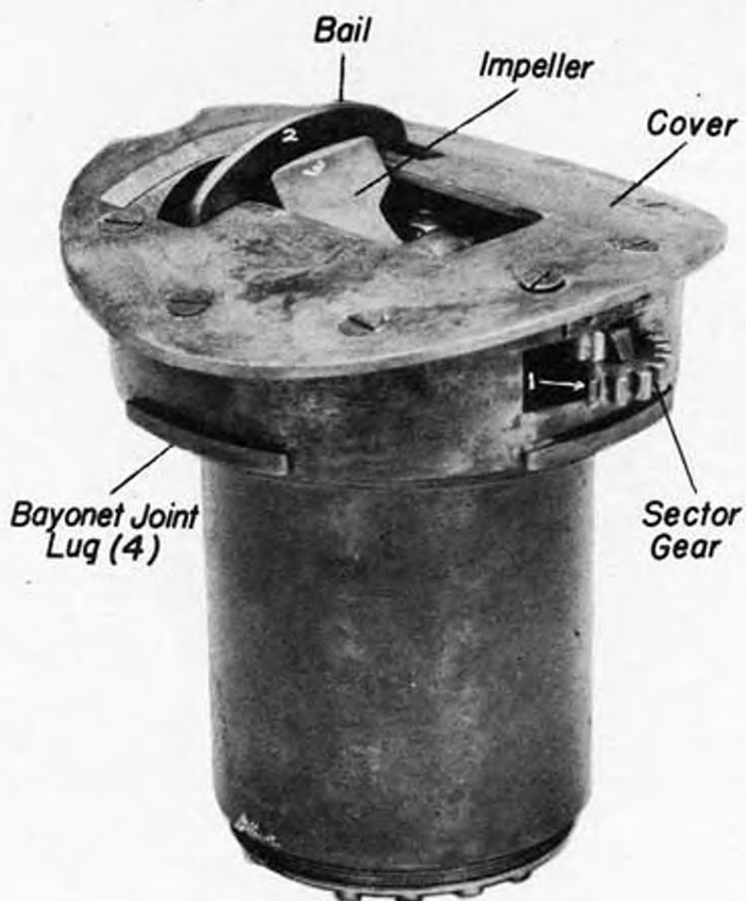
Type 3 Exploder, Booster and Center Ring Removed
